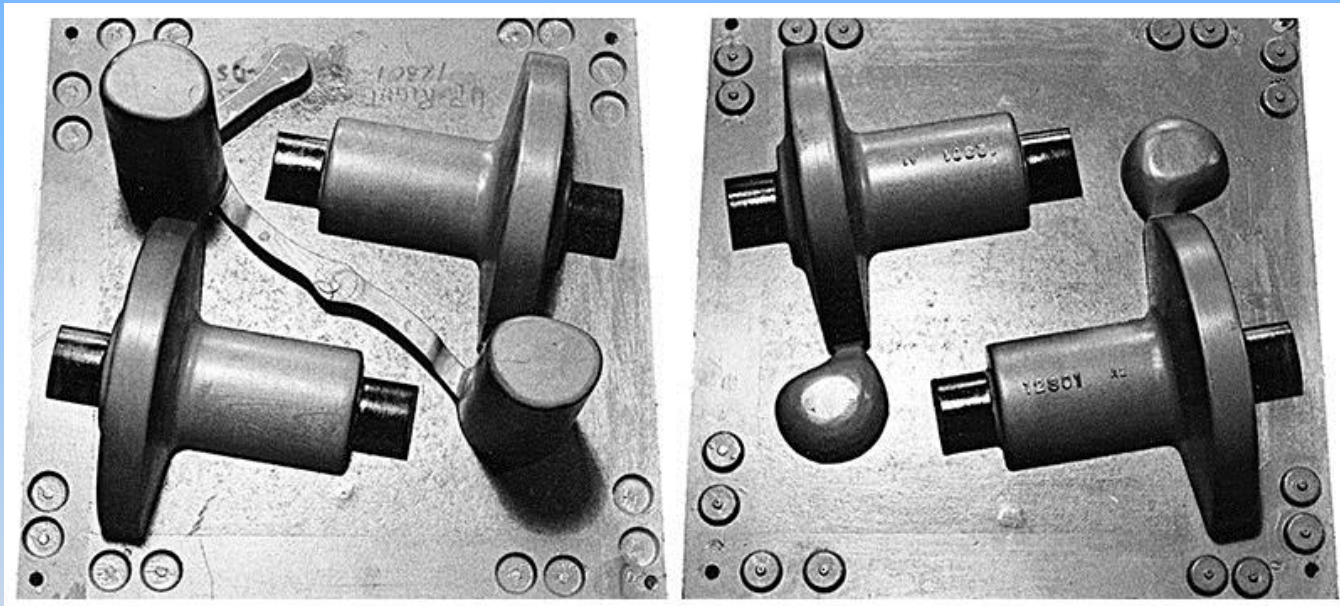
Cope-and-drag pattern for producing two heavy parts. (Left) Cope section; (right) drag section. (Note: These are two separate pattern boards.)
